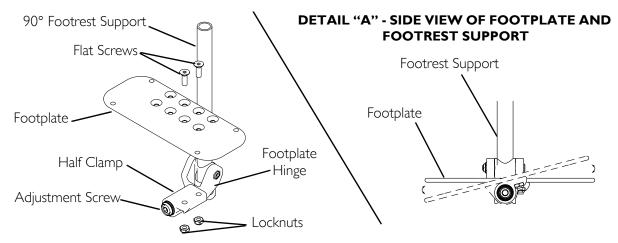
Adjusting Adjustable Angle Flip-Up Footplates
